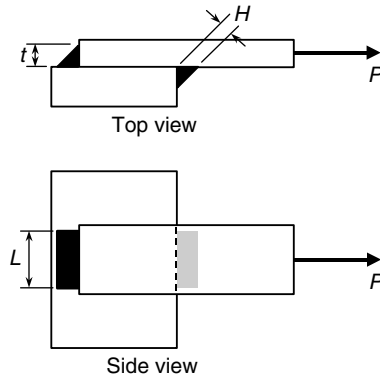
Vertical fillet welds in a transverse joint.
